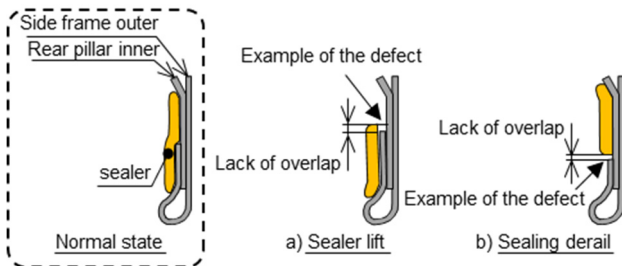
Target Position of the Sealer and Failure Mode / Sealer Dimension Criteria
